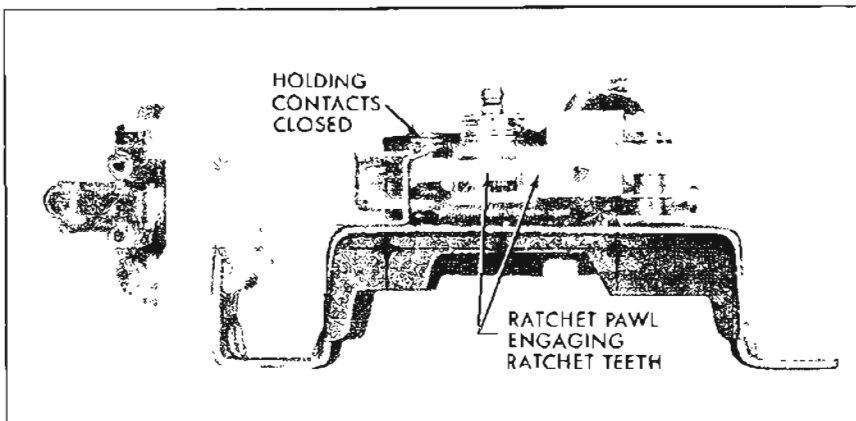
Ratchet Pawl Engaging Ratchet Wheel
